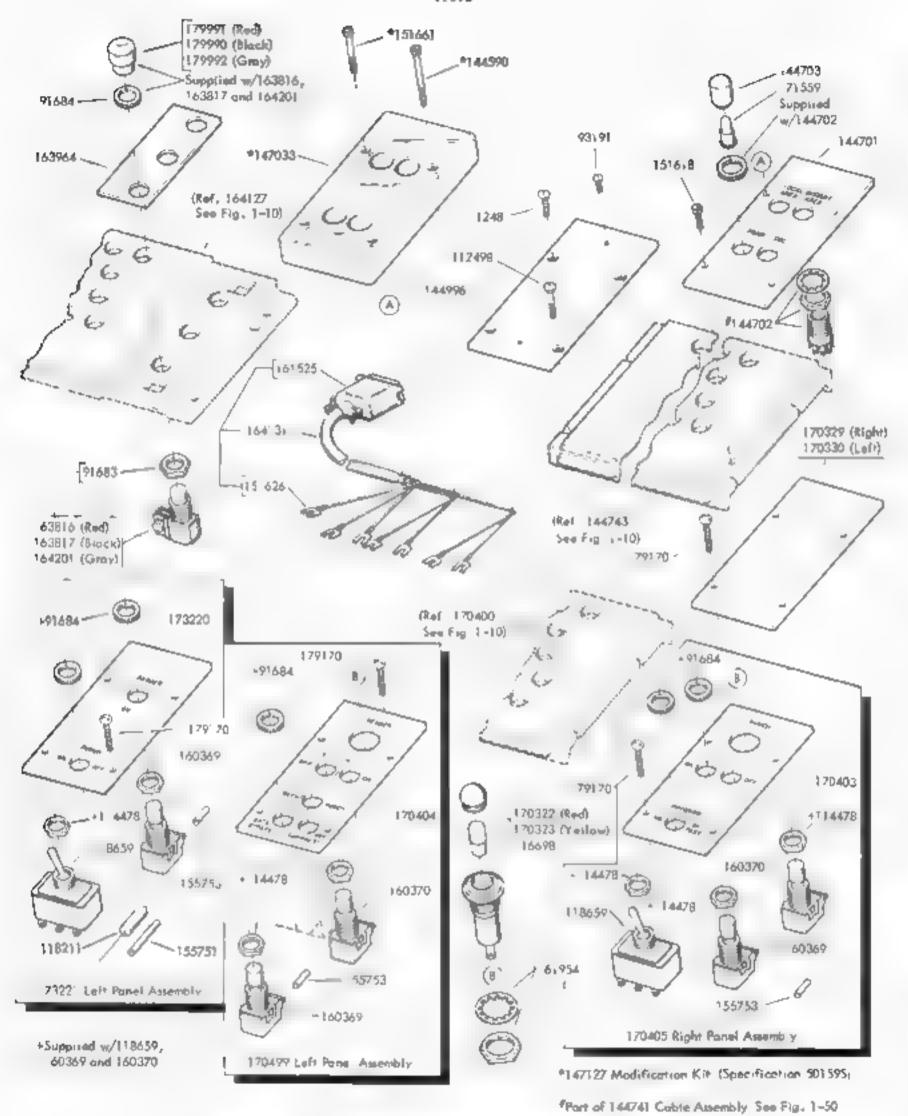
KEYBOARD TOP PLATES AND PANEL ASSEMBLIES
